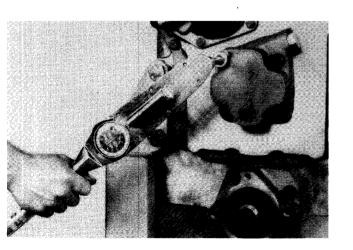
Install capscrews and tighten to specified torque. (See torque chart).
